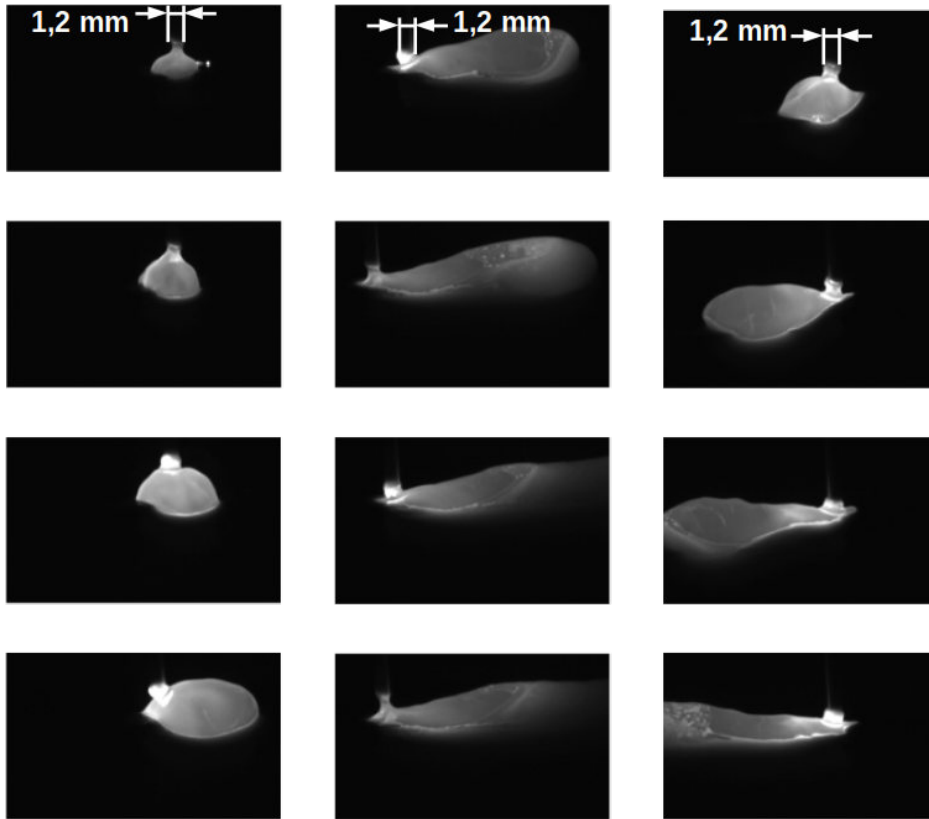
Images obtained with the camera located on the side of the welding torch during the deposit of melted wire: initiation of weld pool for the first layer (1st column), during the 1st layer (2nd column) and for the 2nd layer (3rd column). Experiment was realized with #S1 set of parameters (for dimension indication, the diameter of the feed wire is 1.2 mm).
